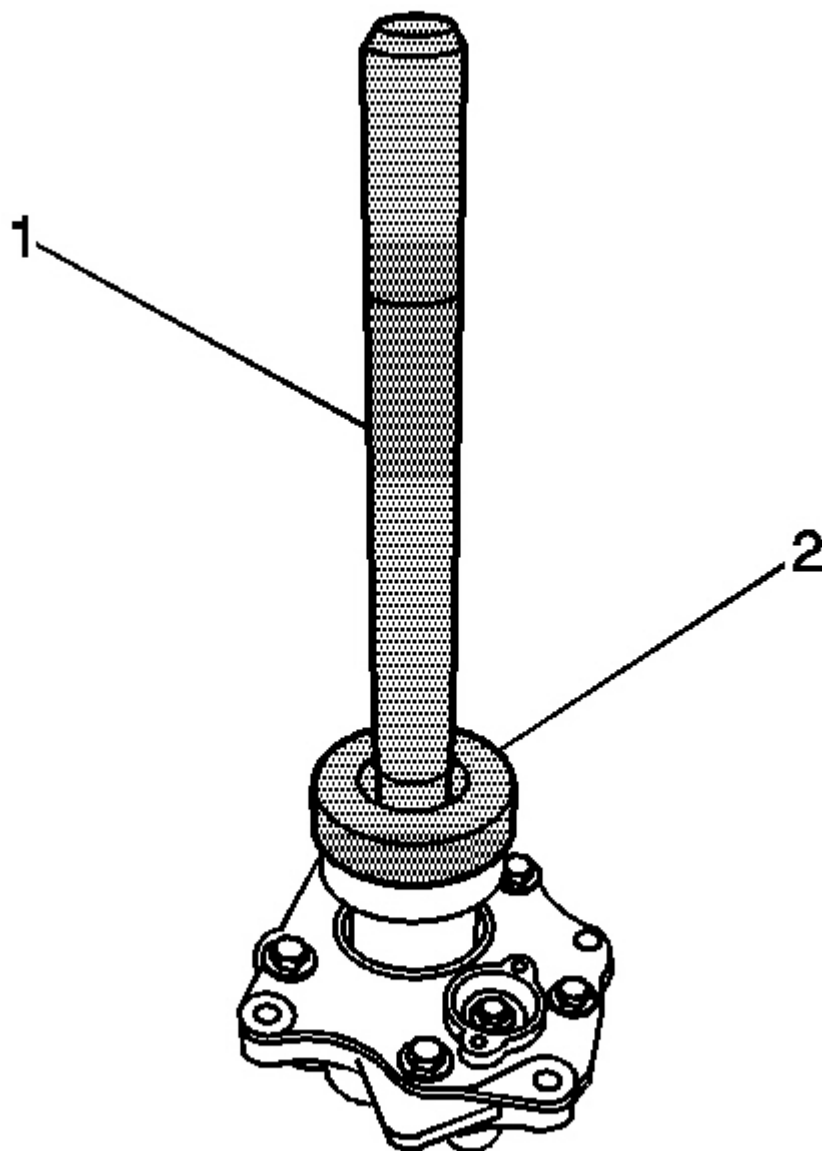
Identifying Axle Seal Installer & Universal Driver Handle
